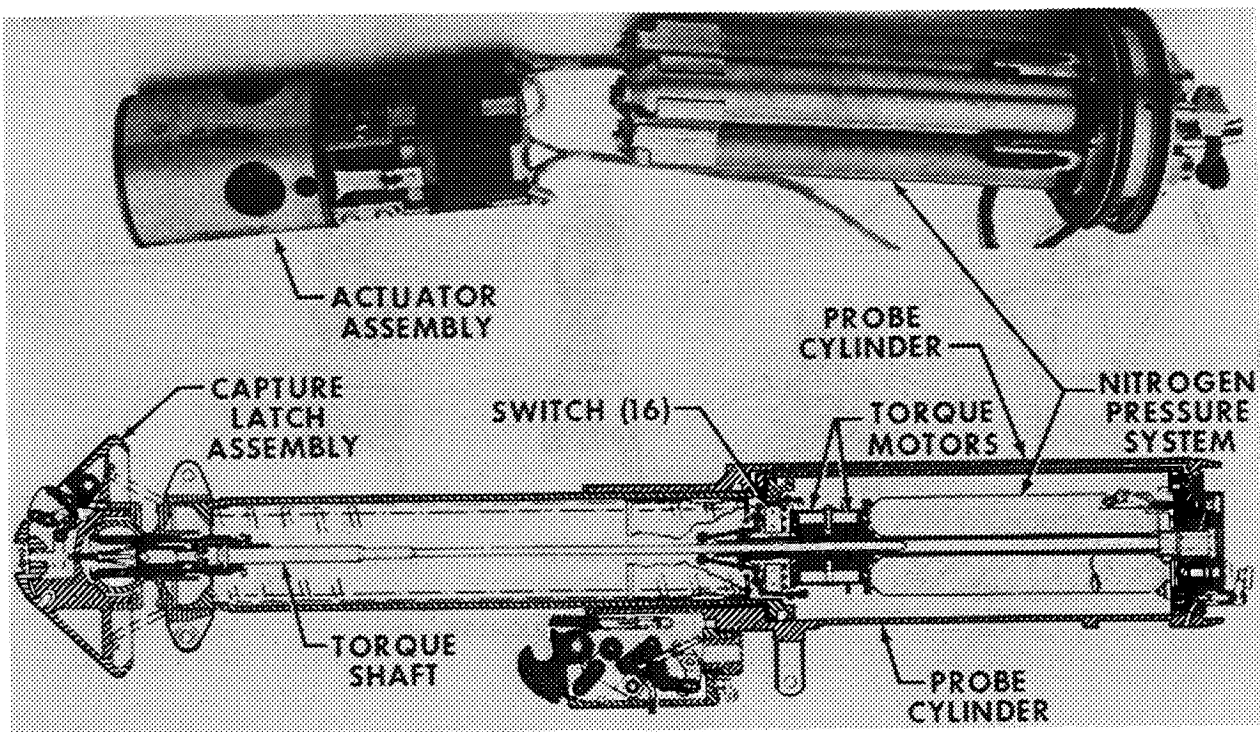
Cutaway of probe assembly in extended and cocked position.
